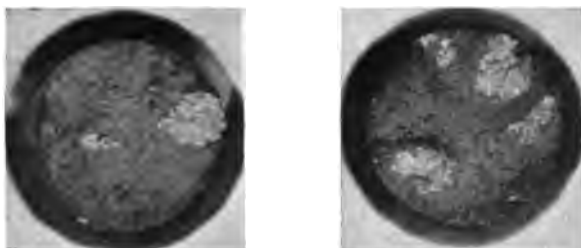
FRACTURES TEST-BAR 948B. SAME FORGING AS FIG. 23 AFTER TWO QUENCHES AND A DRAW. $\times 2$.
